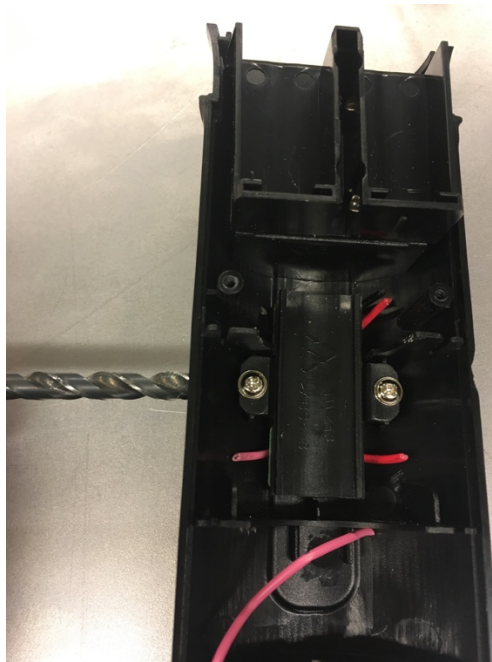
DRILLED HOLE IN BLACK CORKSCREW HOUSING
